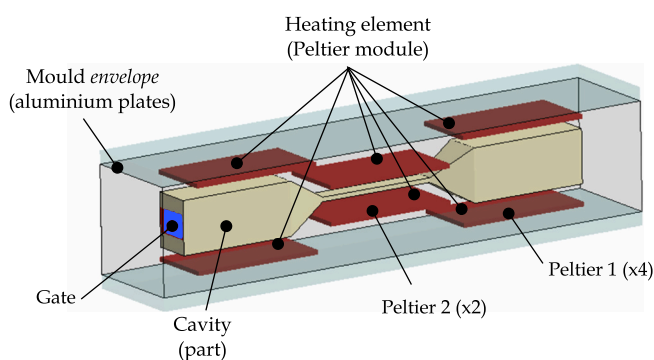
Assembly modelled in Moldex3D filling simulation, consisting of moulded cavity, mould plates and heating/cooling elements.
